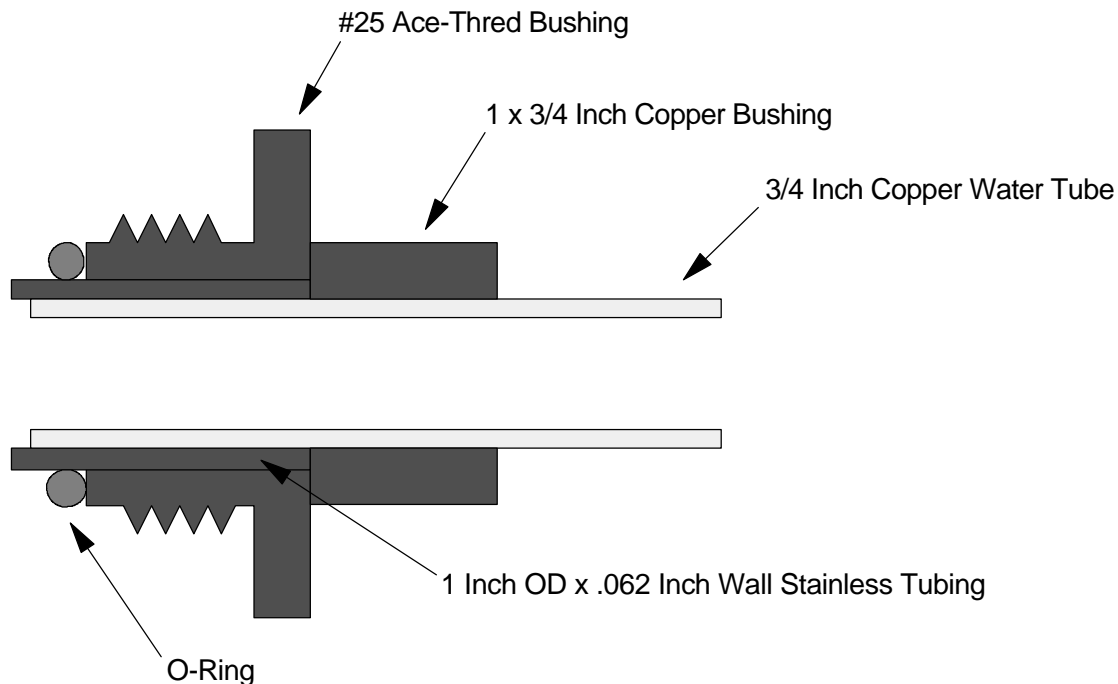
Copper Tube to ACE-Thred Bushing Adapter
